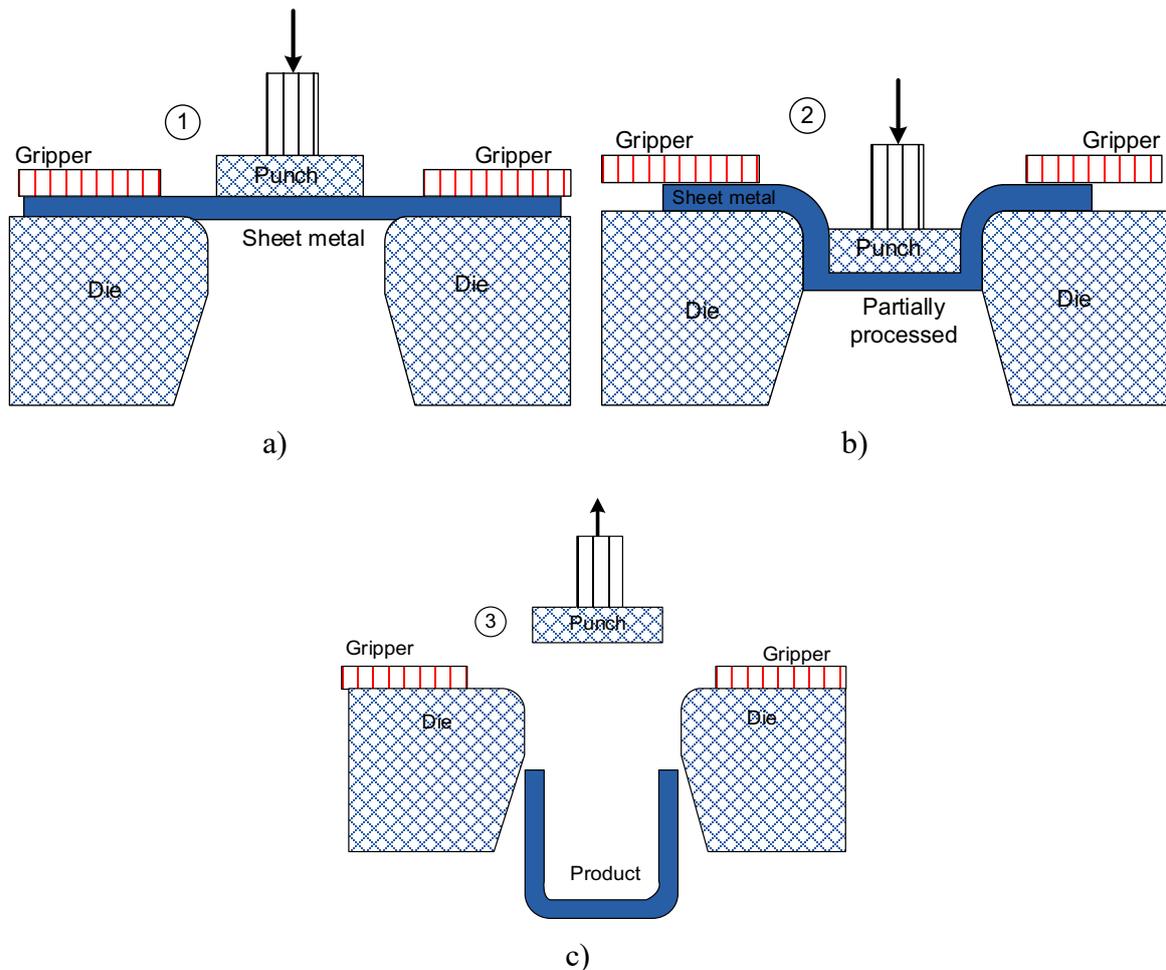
Schematic of the deep drawing process in sequential stages
